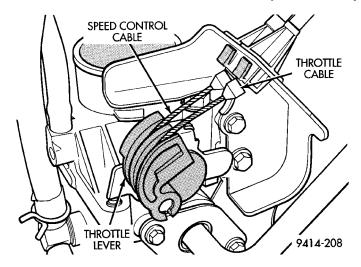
Throttle Cable Attachment to Throttle Body—Manual Transmission
